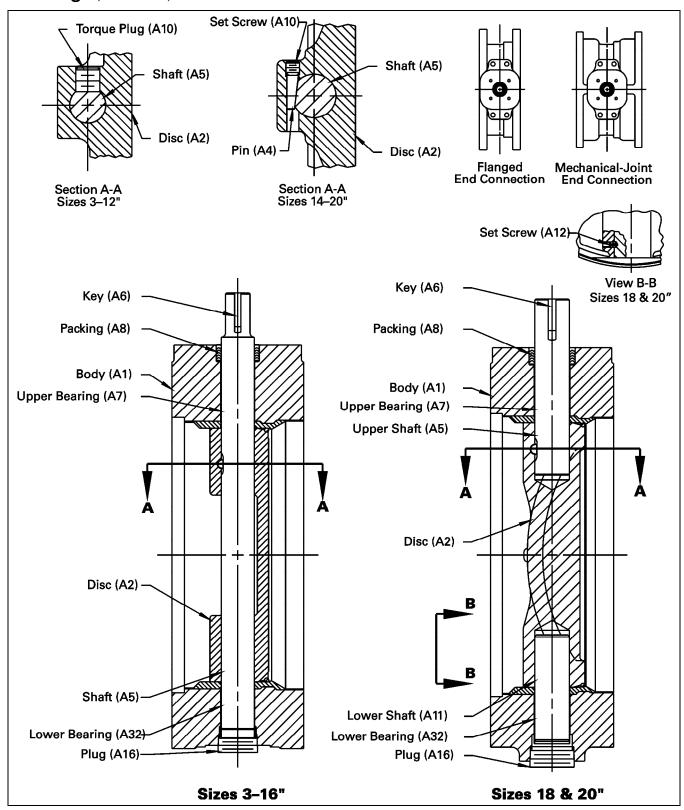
Assembled 3–20" BAW AWWA Butterfly Valve
